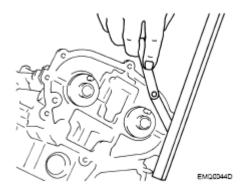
Measuring Difference In Levels Between Front End Faces Of VVEL Ladder Assembly And Cylinder Head Courtesy of NISSAN MOTOR CO., U.S.A.
